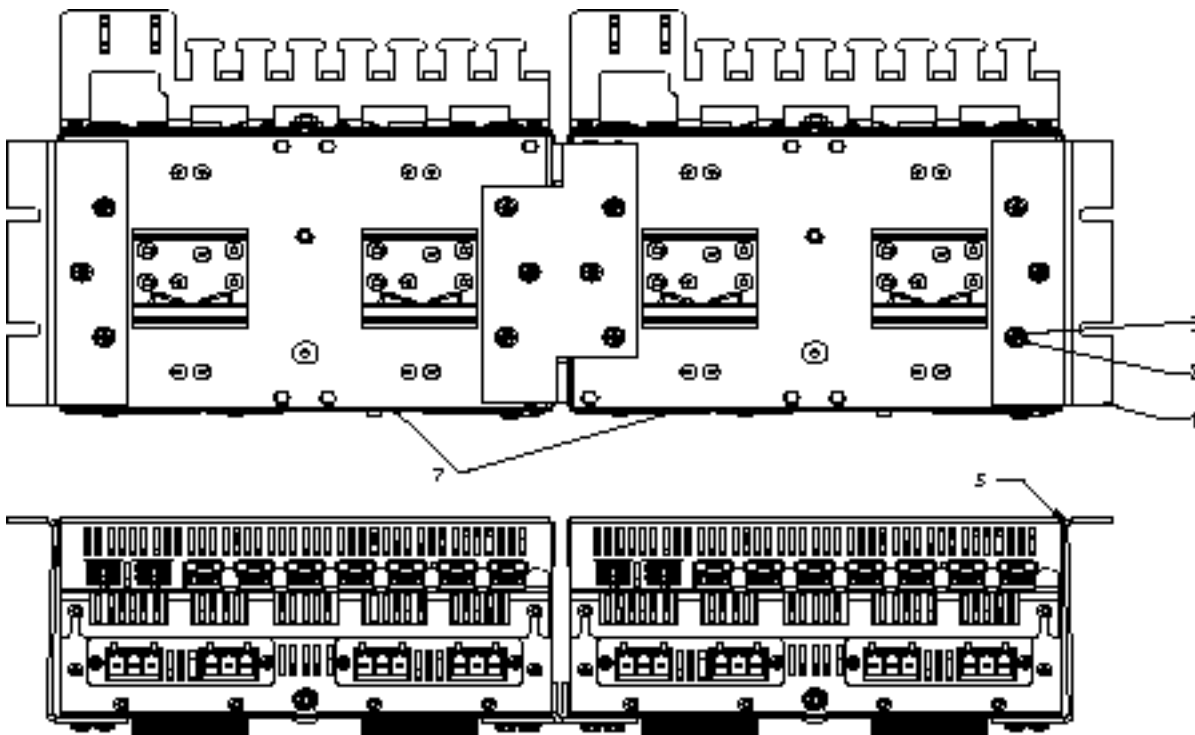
Rack mounting of two IE-Switches X-300EEC fastened together
